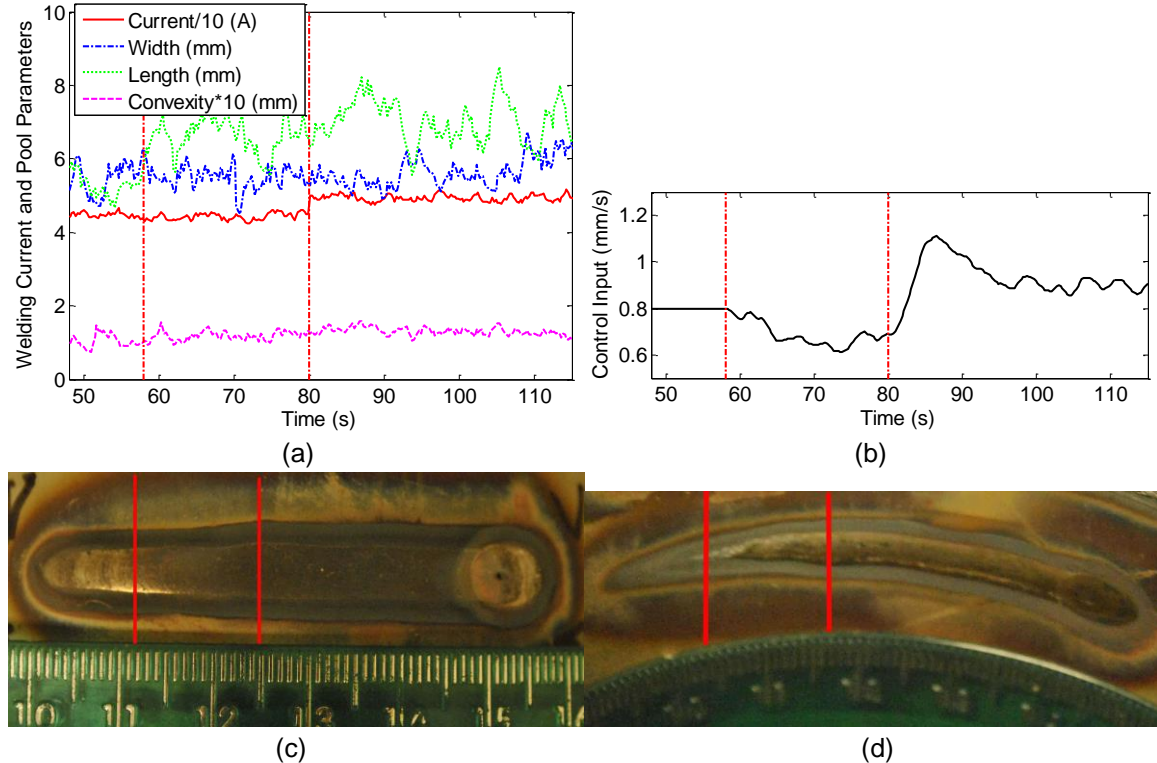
Experiment 1 results (a) Welding current and weld pool parameters (b) Control input (c) Front-side bead (d) Back-side bead.
